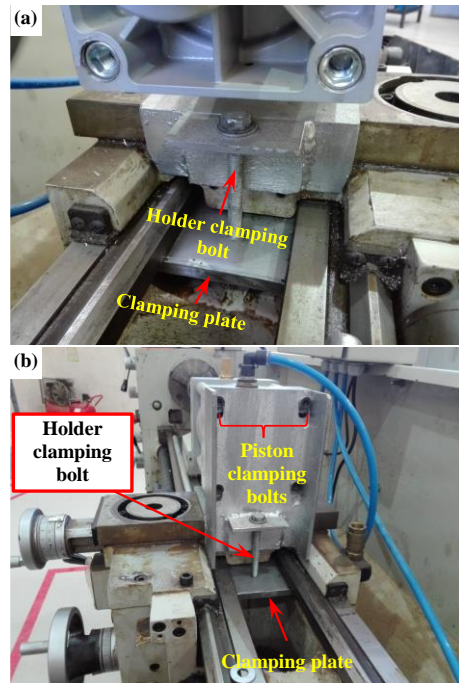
Clamping method for the piston holder with the carriage and bed (a) Right hand side view (b) Left hand side view.
